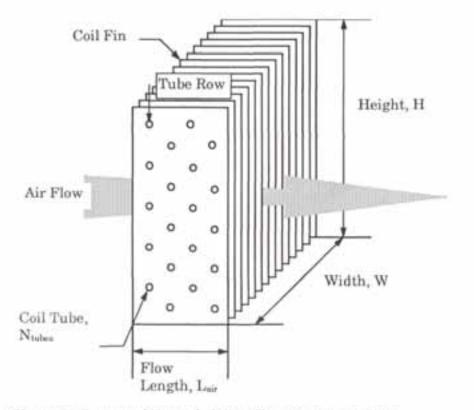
Staggered Expanded Tube Heat Exchanger Coil
